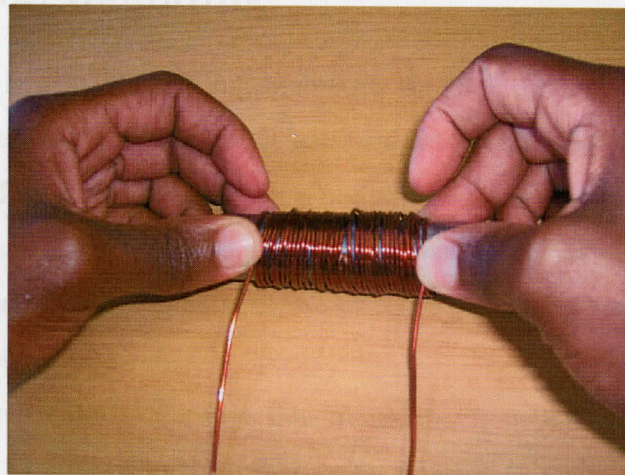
Coils wound around the rod, ready to be placed inside the silicone mould for casting
